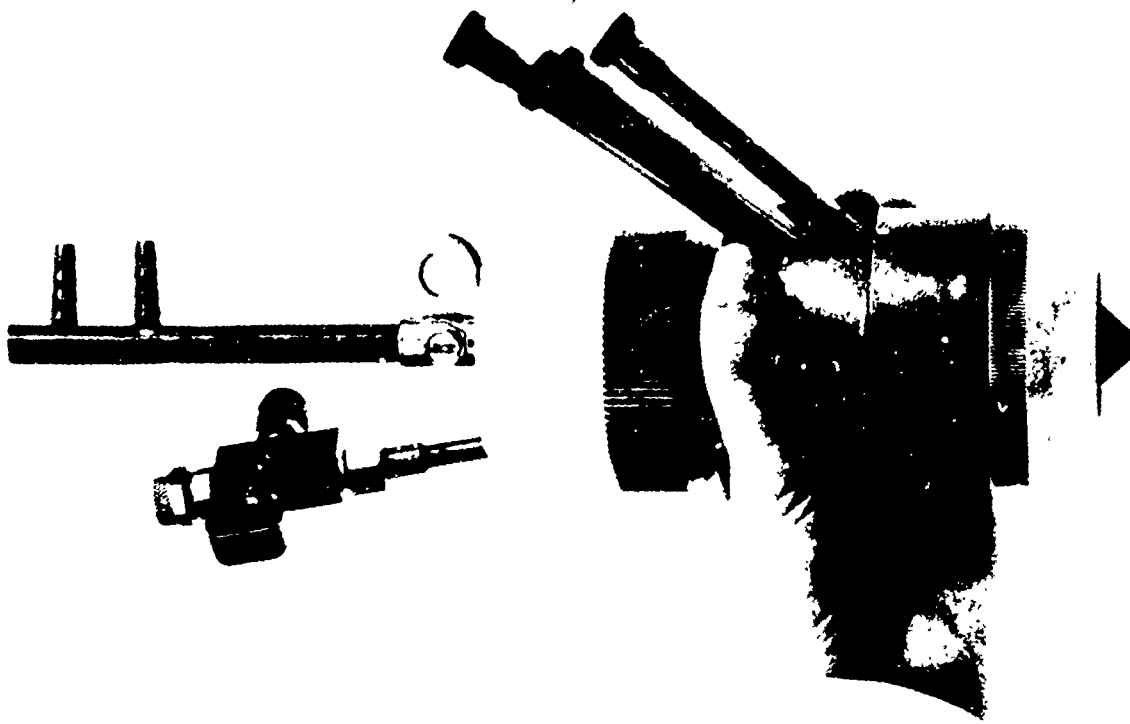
PLASMA-GMA WELDING NOZZLE AS FABRICATED BY PHILLIPS CO.
